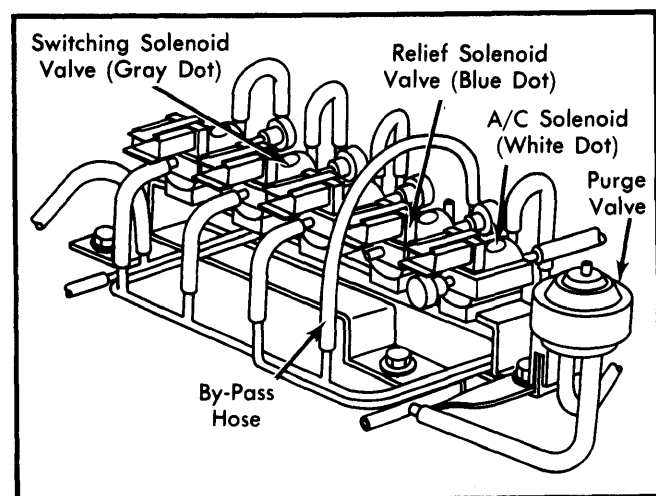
Hose Arrangement for Checking Air Control Valve Operation
